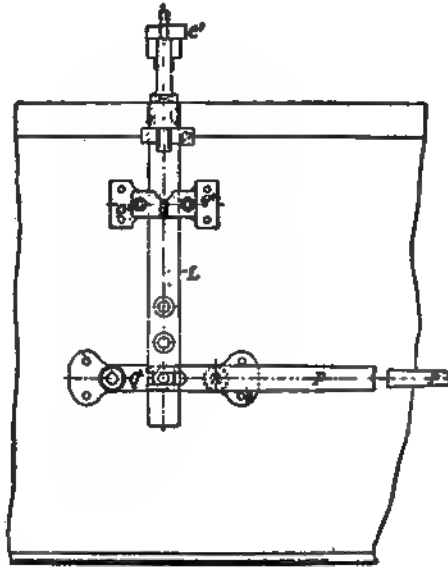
Details of Casting Ladle. (Harbord and Hall.)
